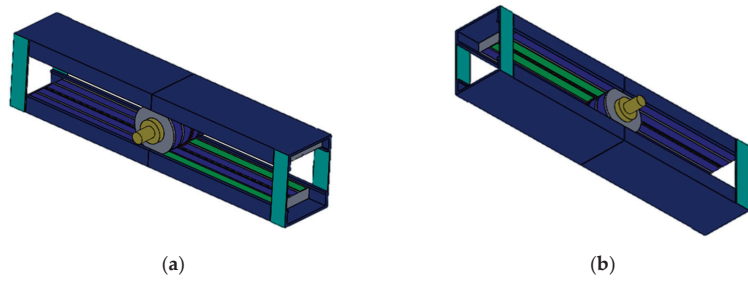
Isometric view of the double rack and pinion actuator: (a) base rack; (b) top rack.
